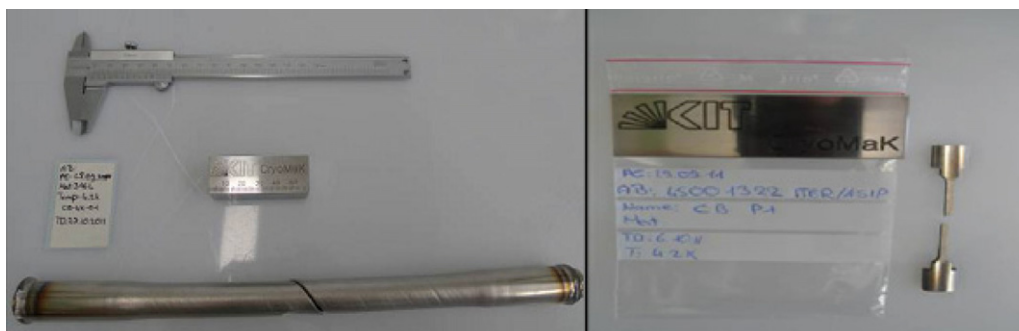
Fracture surface of CB tensile samples tested at low temperature (<7 K) in KIT.
